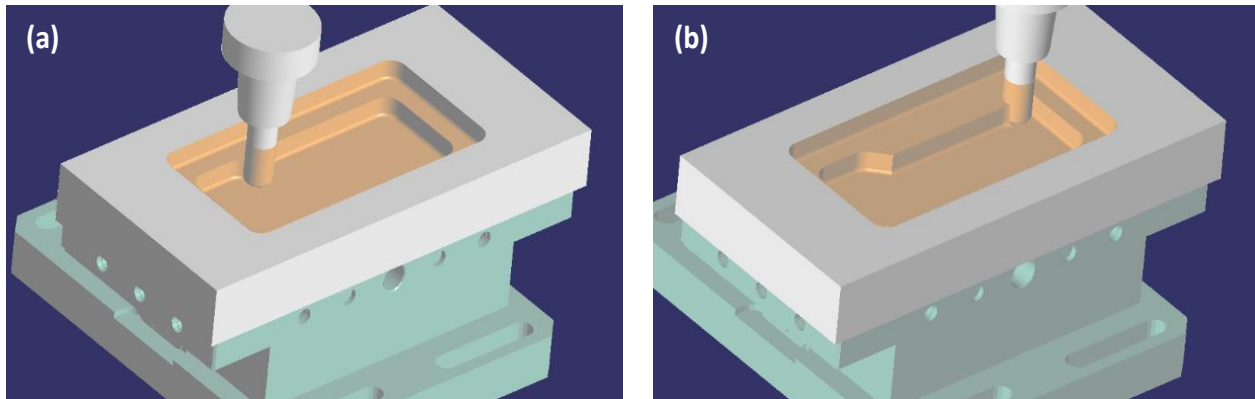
Conventional roughing tool path cutting at a corner (a) and a straight pass (b)
